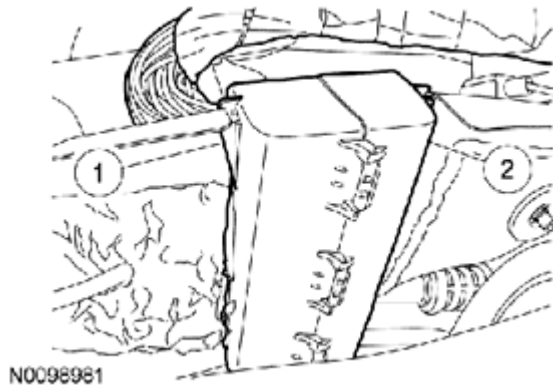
Locating HO2S And CMS Wire Connector Bracket Nut
